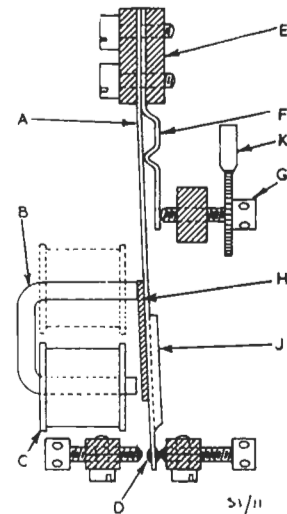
Mechanical Arrangement of Single-contact High-speed Relay
